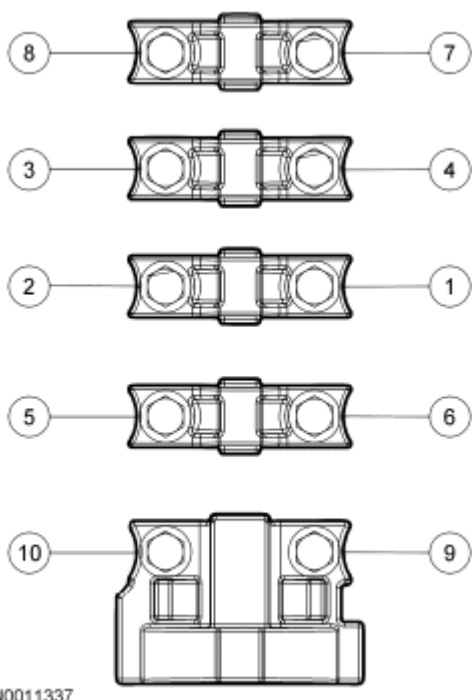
Identifying Camshaft Bearing Cap Bolt In Sequence
